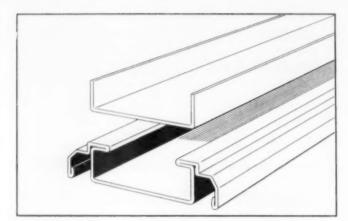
In designing rolls, the open side of the section to be formed is generally made to face up, as shown above.
